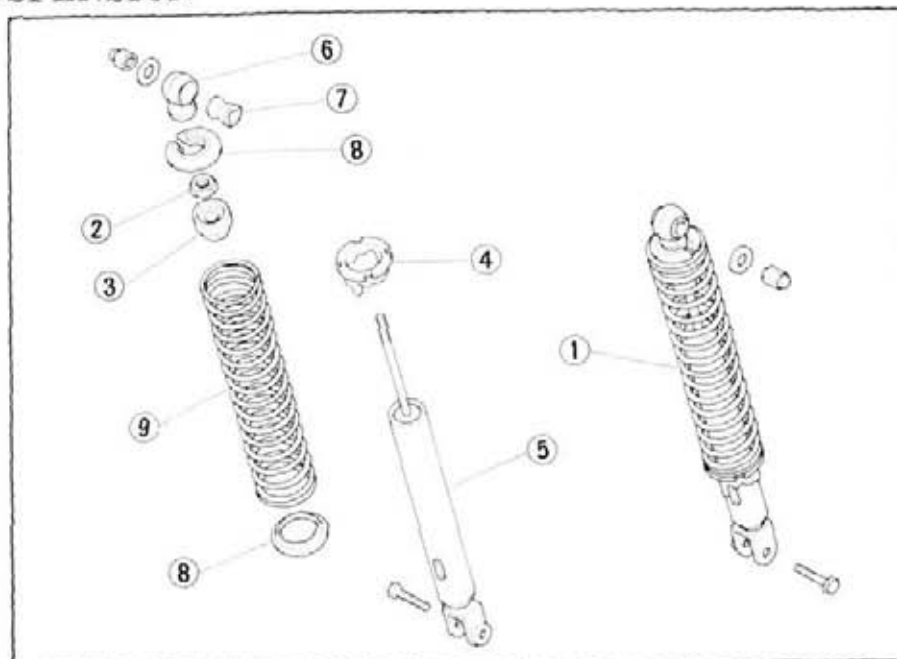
① Rear shock absorber assembly ④ Spring adjuster ⑦ Joint rubber
